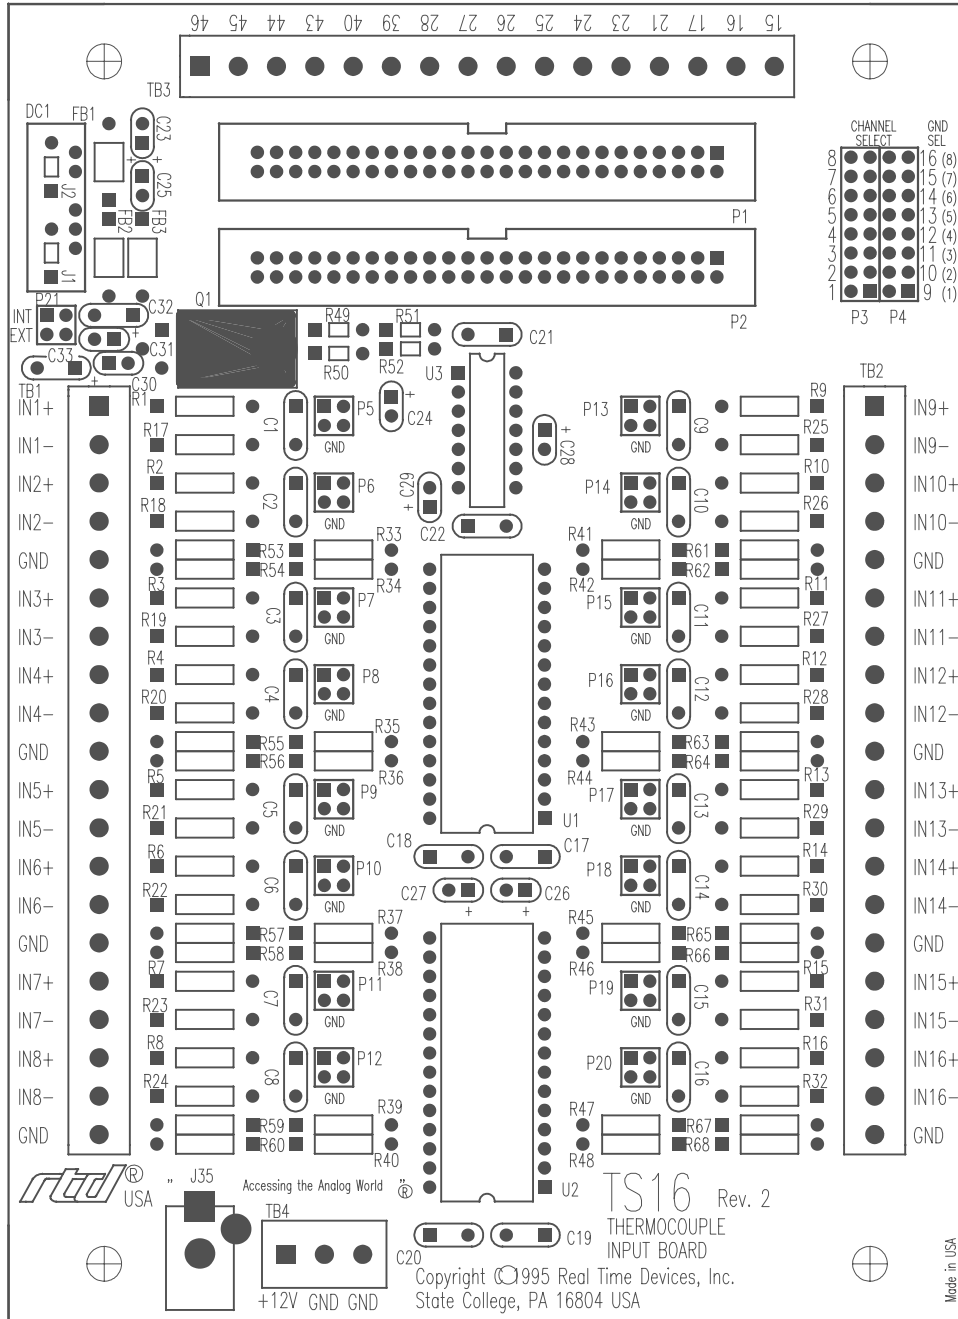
Board Layout Showing Factory-Configured Settings
